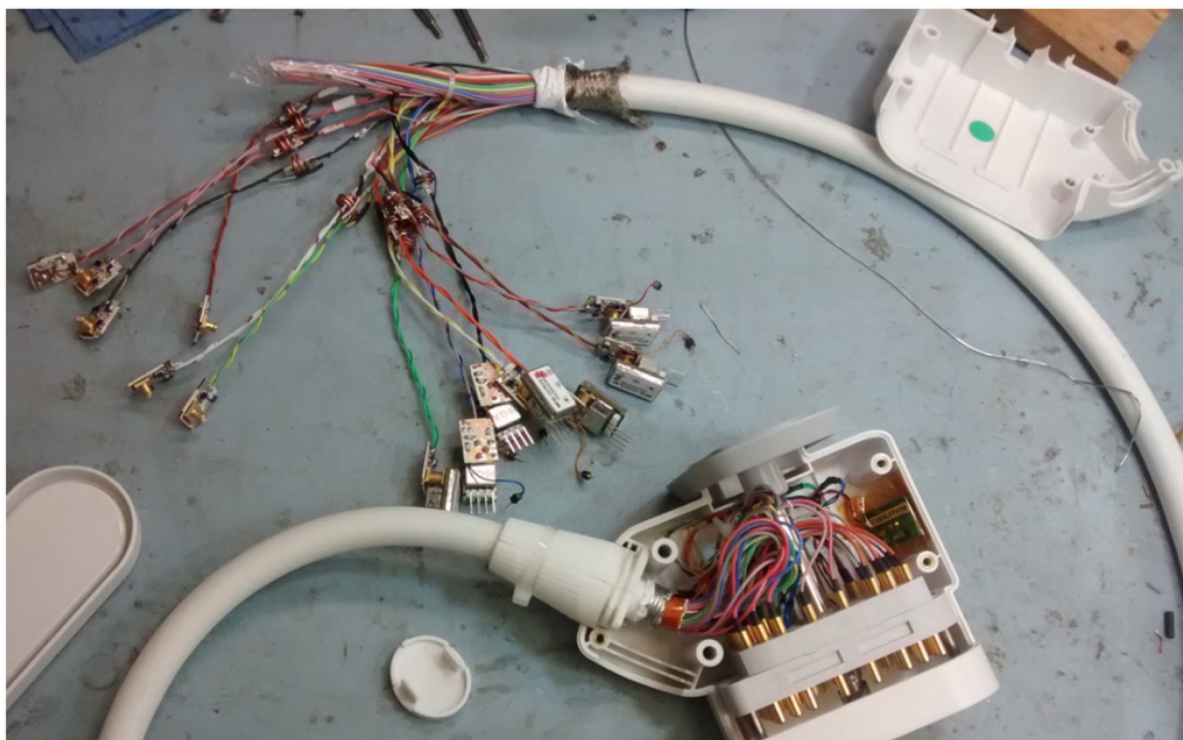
Coil cable with all cable traps and output boards connected. Some preamplifiers are plugged to the output boards. The P connector is open showing the coil ID card.
